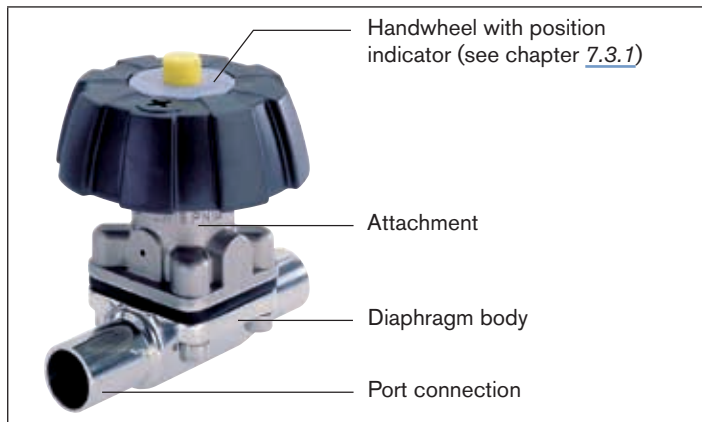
Example of the 2/2-way valve type 3232, 3233 and 3233 K
